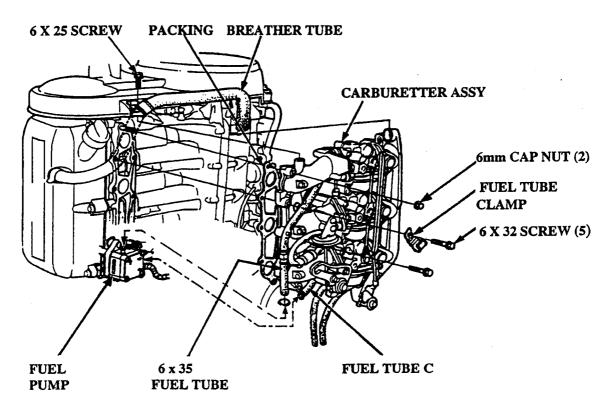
Intake manifold, carburettors and fuel tubes
